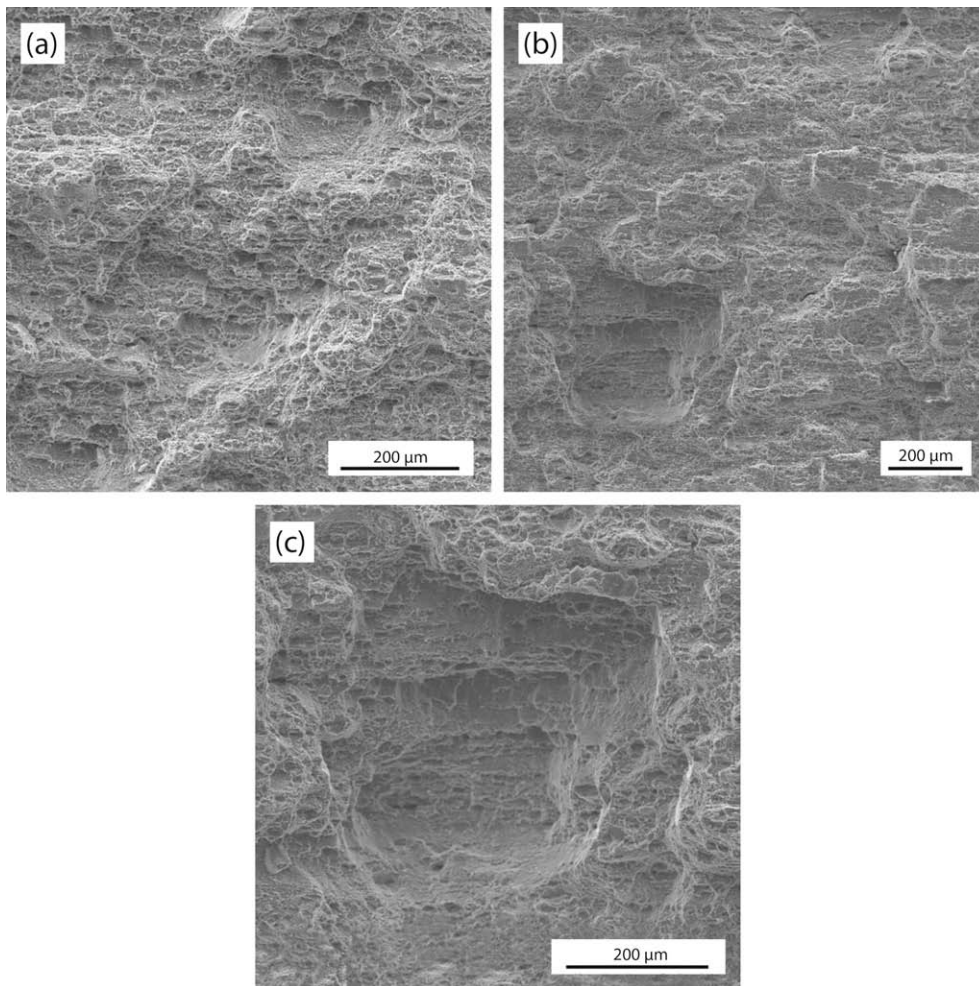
SEM fractographs of broken  $K_{Ic}$  specimens showing overall morphology of fracture surfaces: (a) alloy 1; (b), (c) alloy 2.
